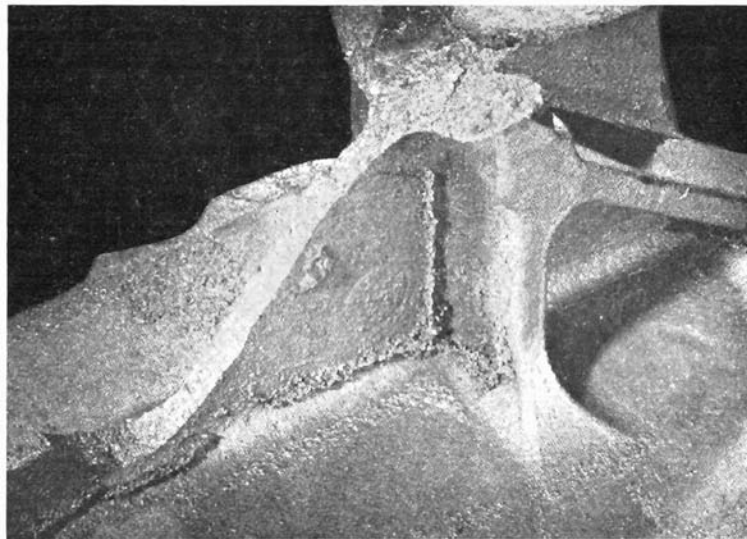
Veining caused by the penetration of cast high-duty iron into cracks in an oil-bonded core.
